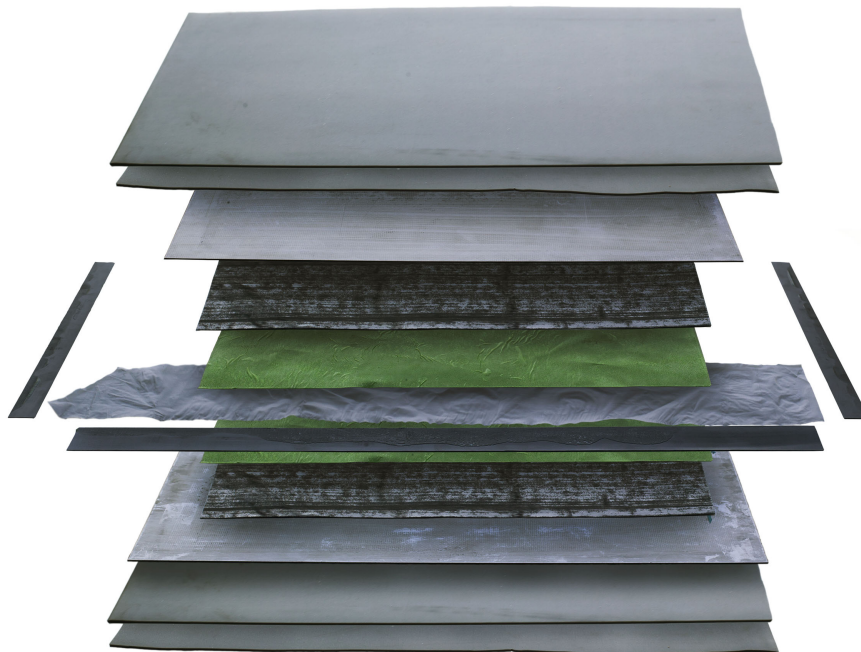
Exploded views of all the components needed in the lamination process of the resin-reinforced plate; top to bottom: two rubber sheets, nonstick metal plates, Scotch Weld, carbon prepreg, Teflon sheet (with three lateral dams), Scotch Weld, carbon prepreg, nonstick metal plate, two rubber sheets.
